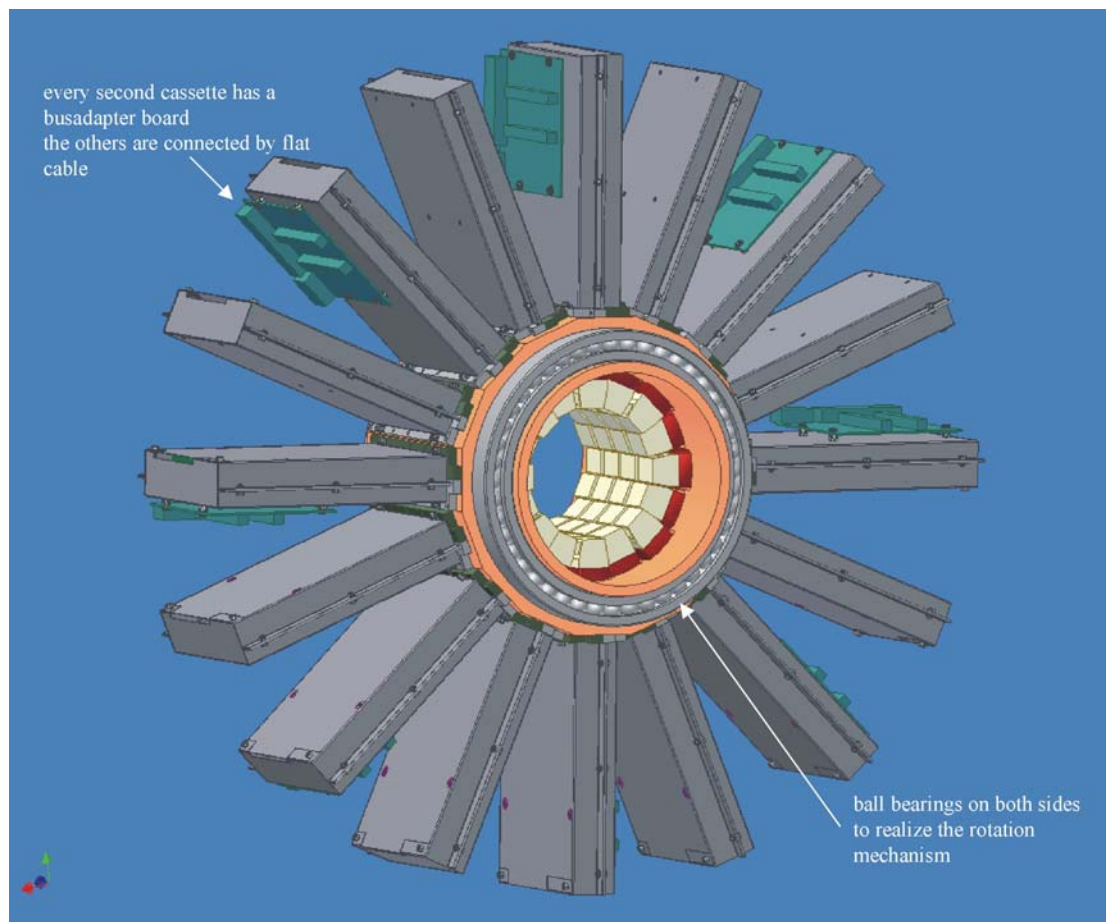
3D view of the final 4-ring ClearPET scanner consisting of 16 PMTs per ring.
